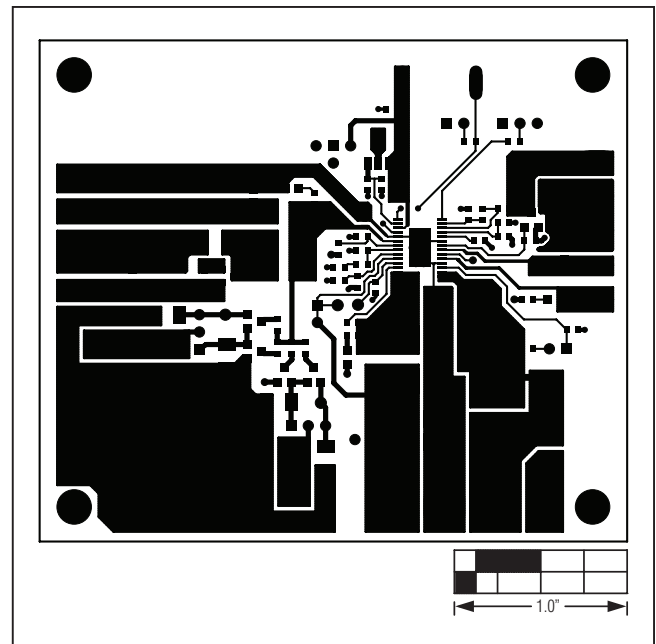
MAX16929 EV Kit PCB Layout—Component Side
